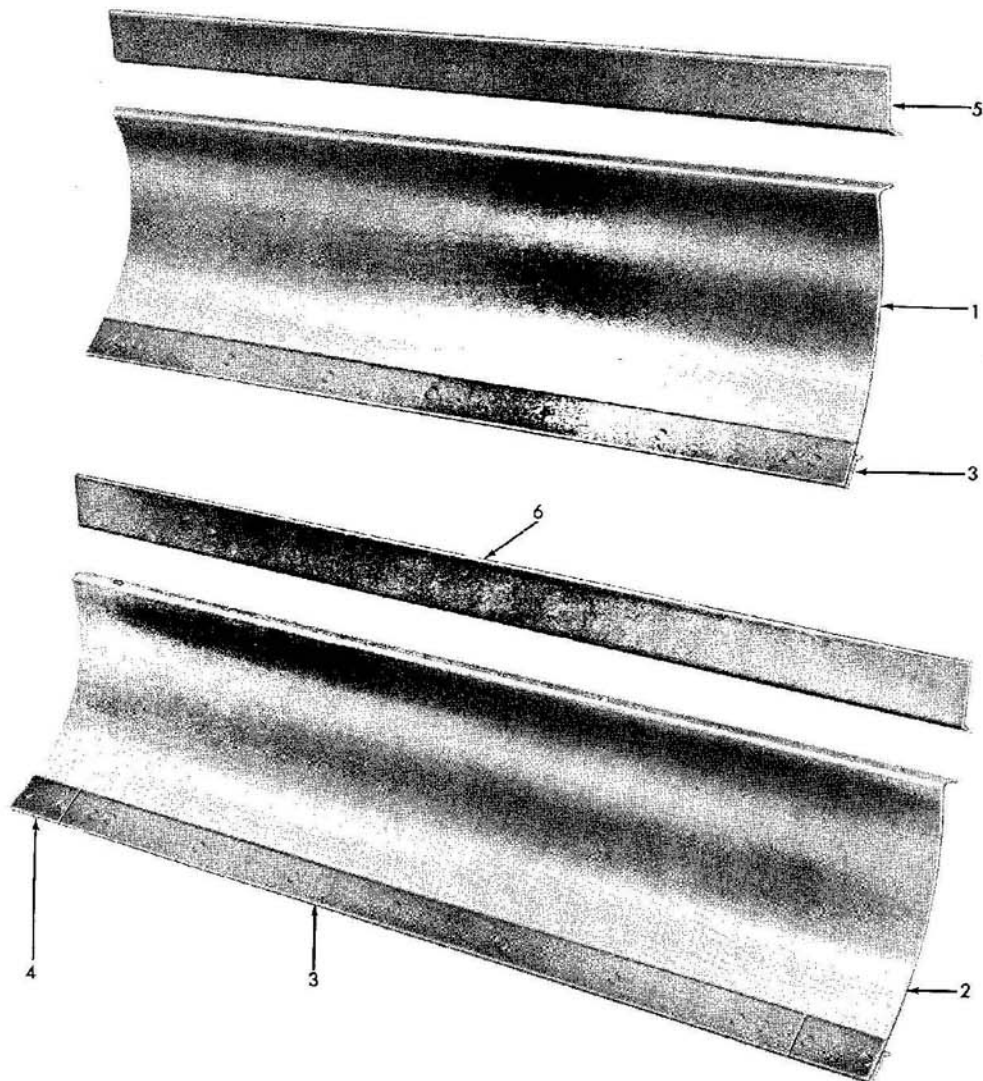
Blade Assembly 6Ft and 7Ft Universal Dozer
